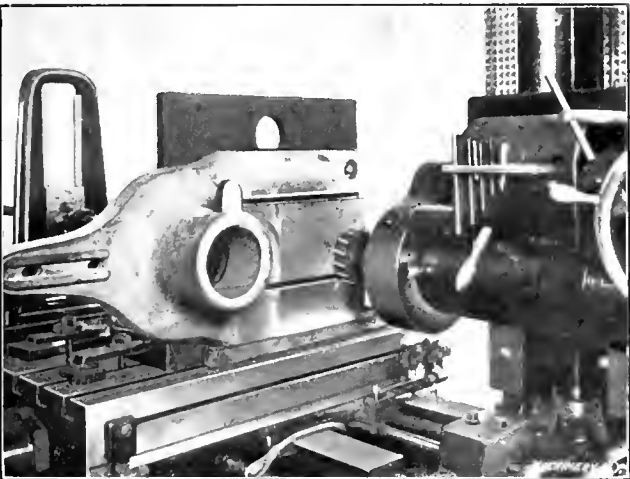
Milling the Drill Press Base in a Horizontal Boring Machine
